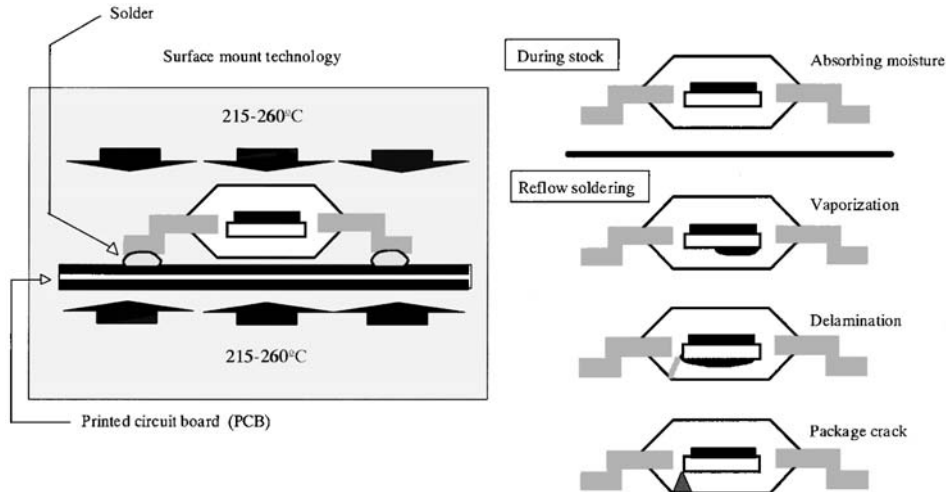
The solder crack mechanism at surface mounting process (SMT).
